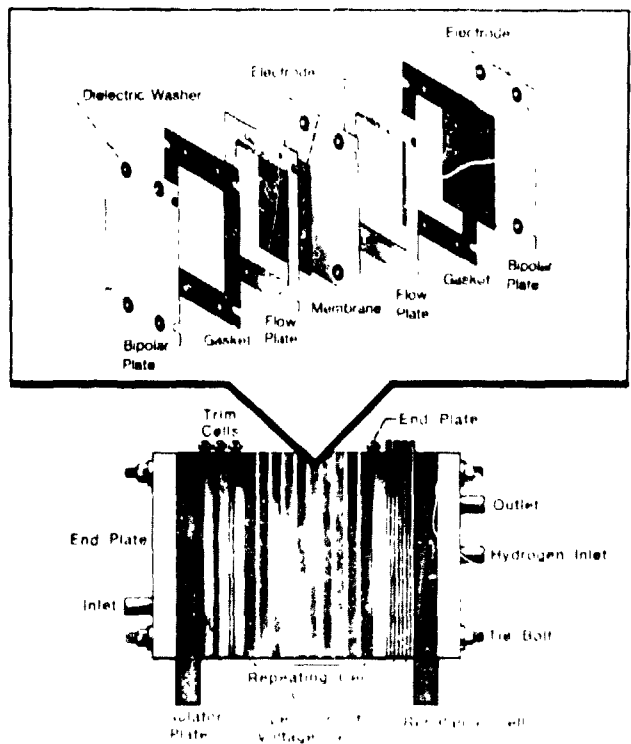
Exploded view of a single cell assembly with an expanded view of the single cell components.
